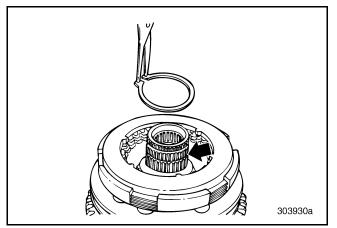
Removing Shaft Snap Ring (T313L/T318L Shown)
